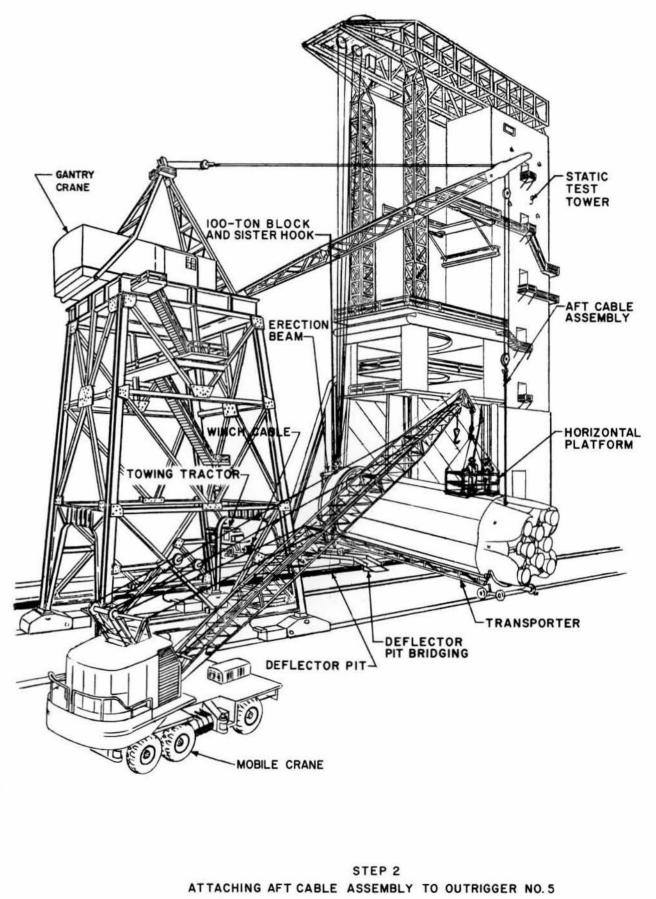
ATTACHING ERECTION BEAM AND CABLE ASSEMBLIES
